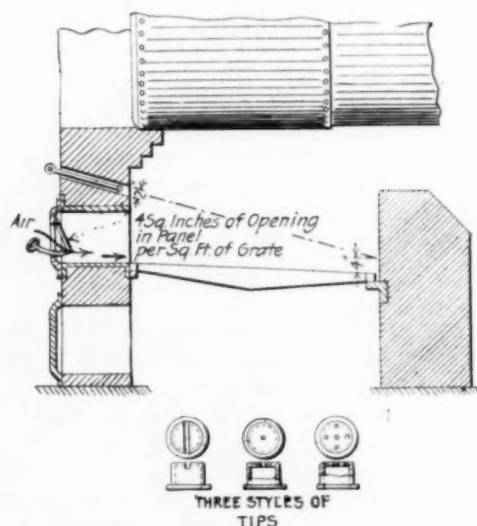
DETAILS OF STEAM JET AND PANEL DOORS
